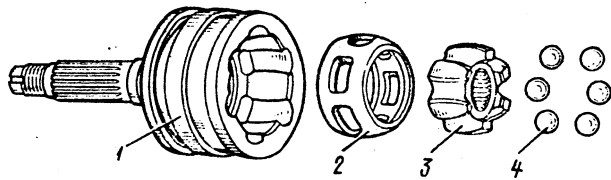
Front Wheel Drive Outer Joint Parts:
